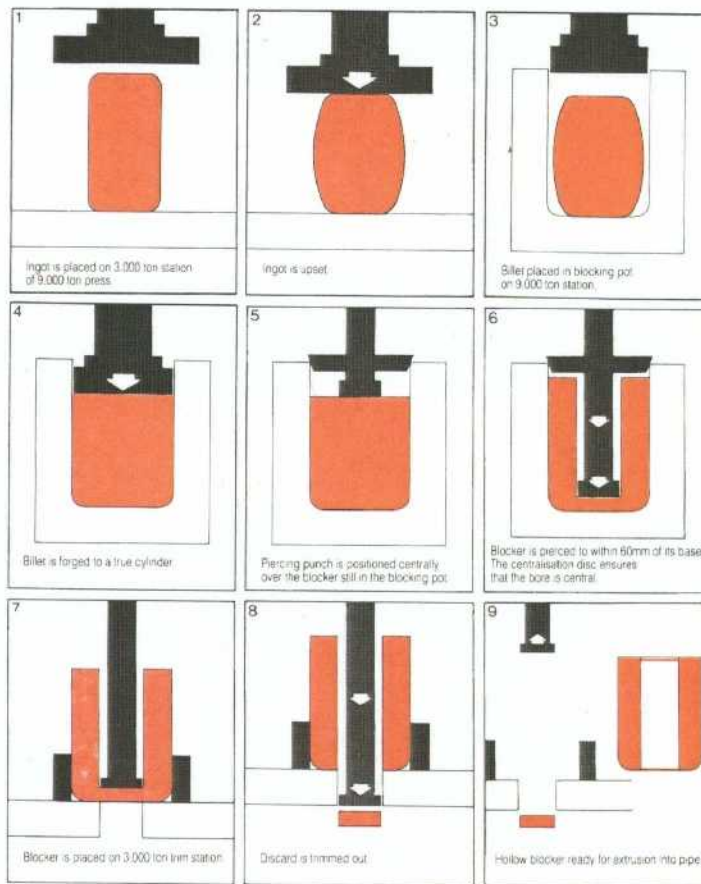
Stage 1 in the extrusion process. Upset forging and punching of copper ingot to a blank for extrusion.
